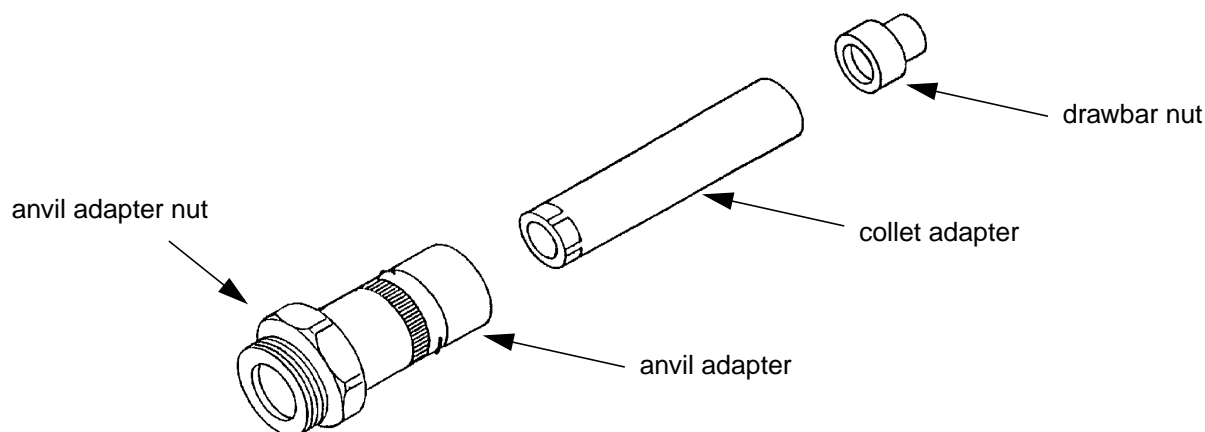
Assembly of Offset Nose Piece to Hydraulic Pulling Head
